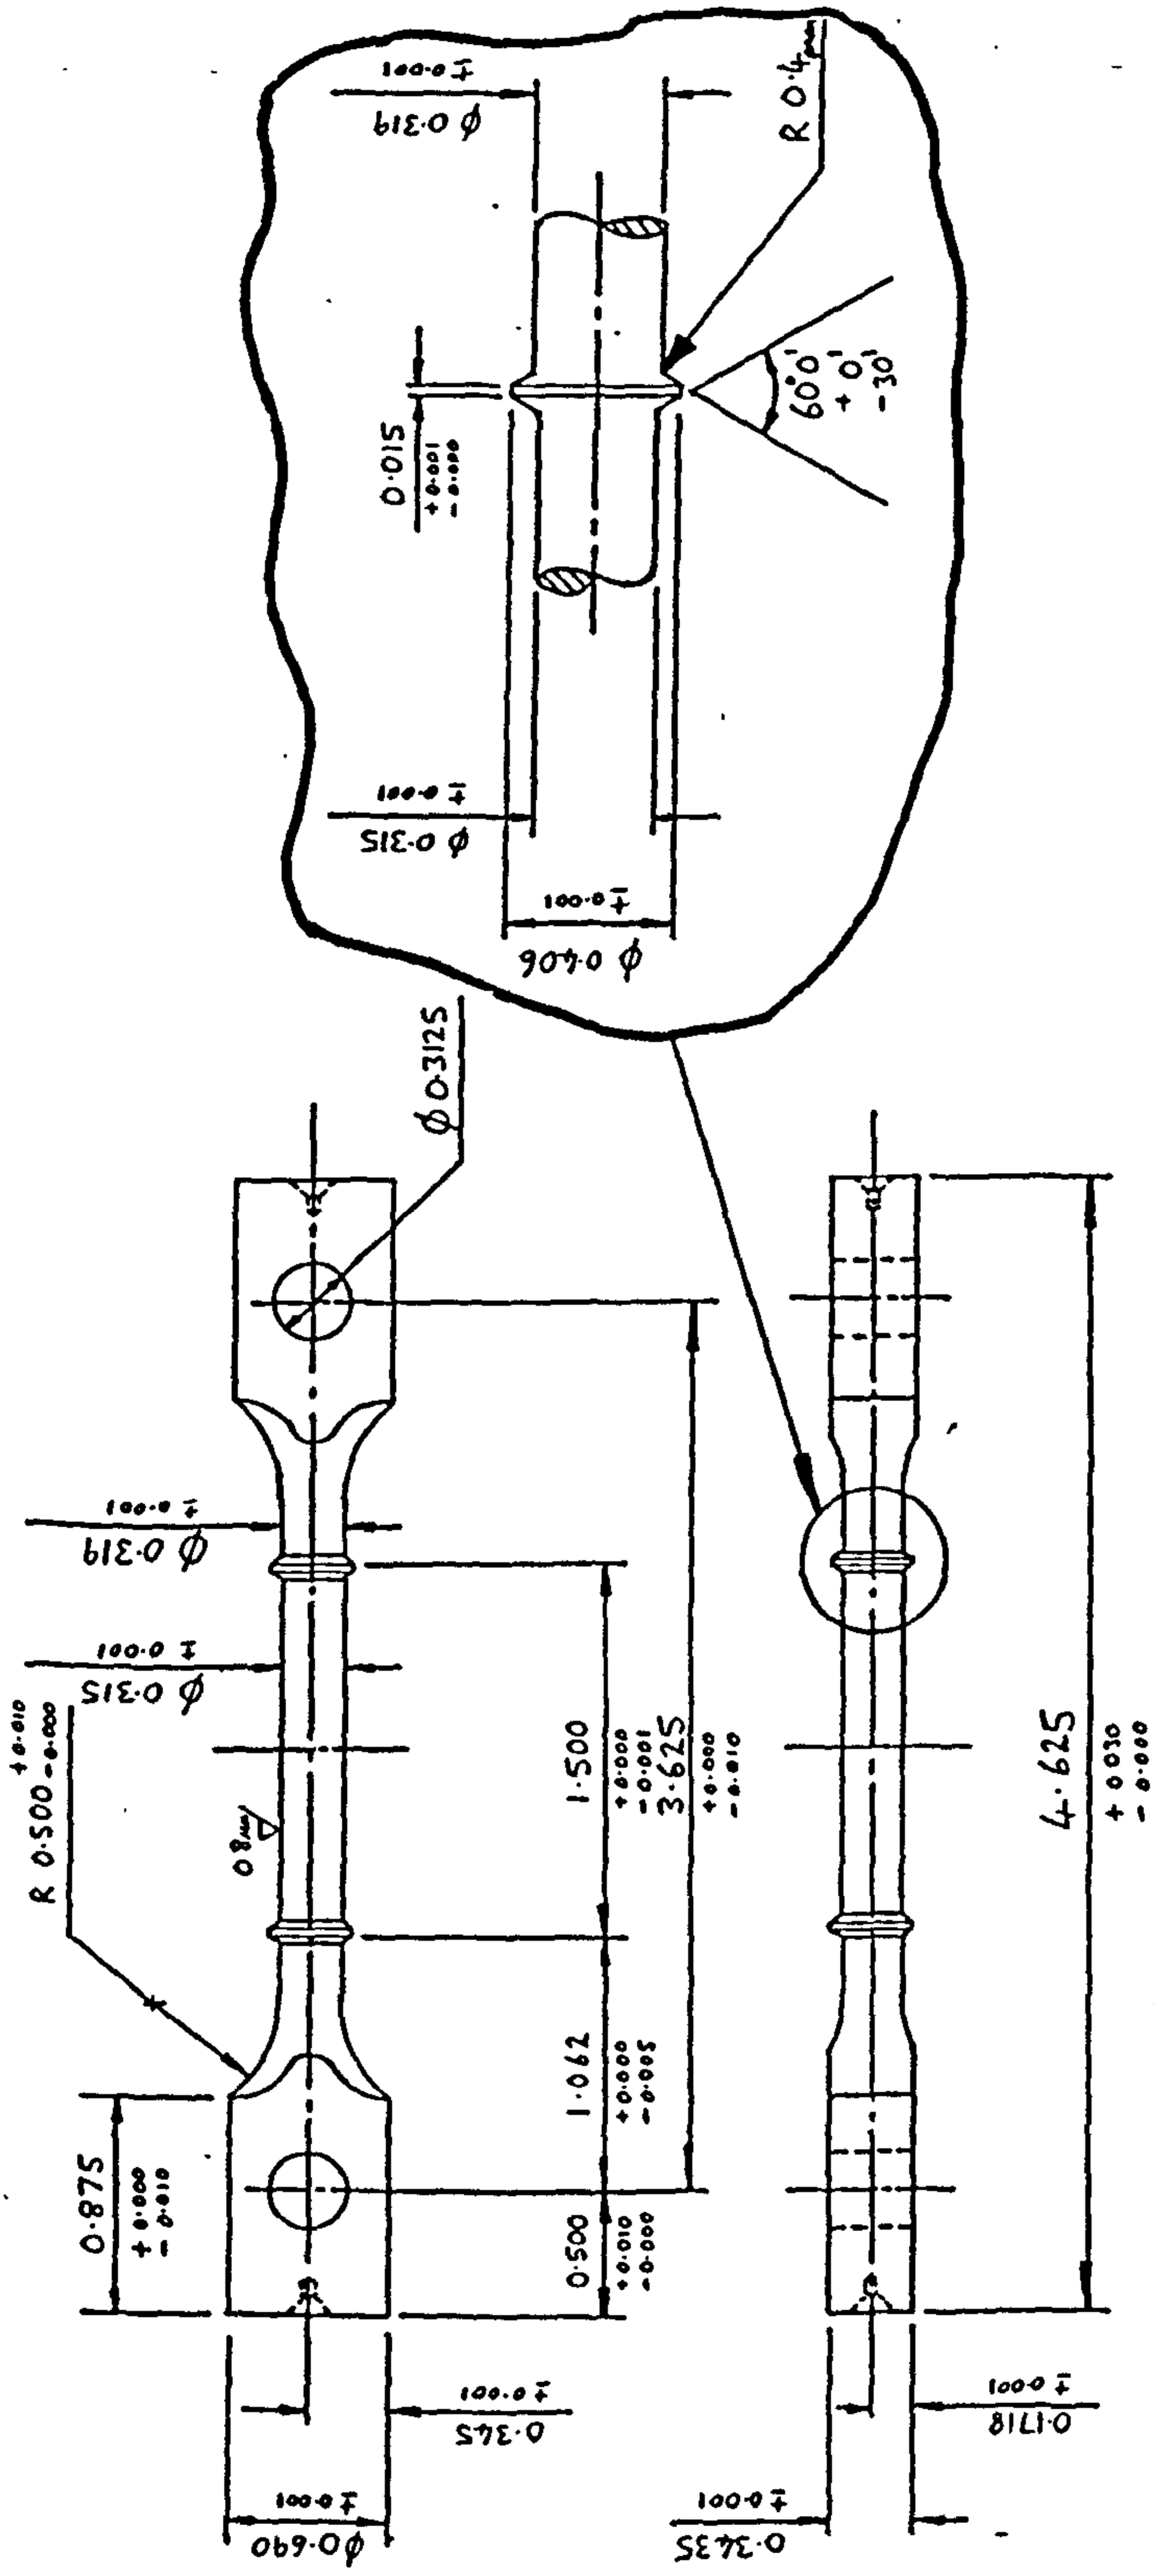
Engineering drawing of a creep tension specimen, as used in the creep tests of the author. (All dimensions in inches except where stated).
